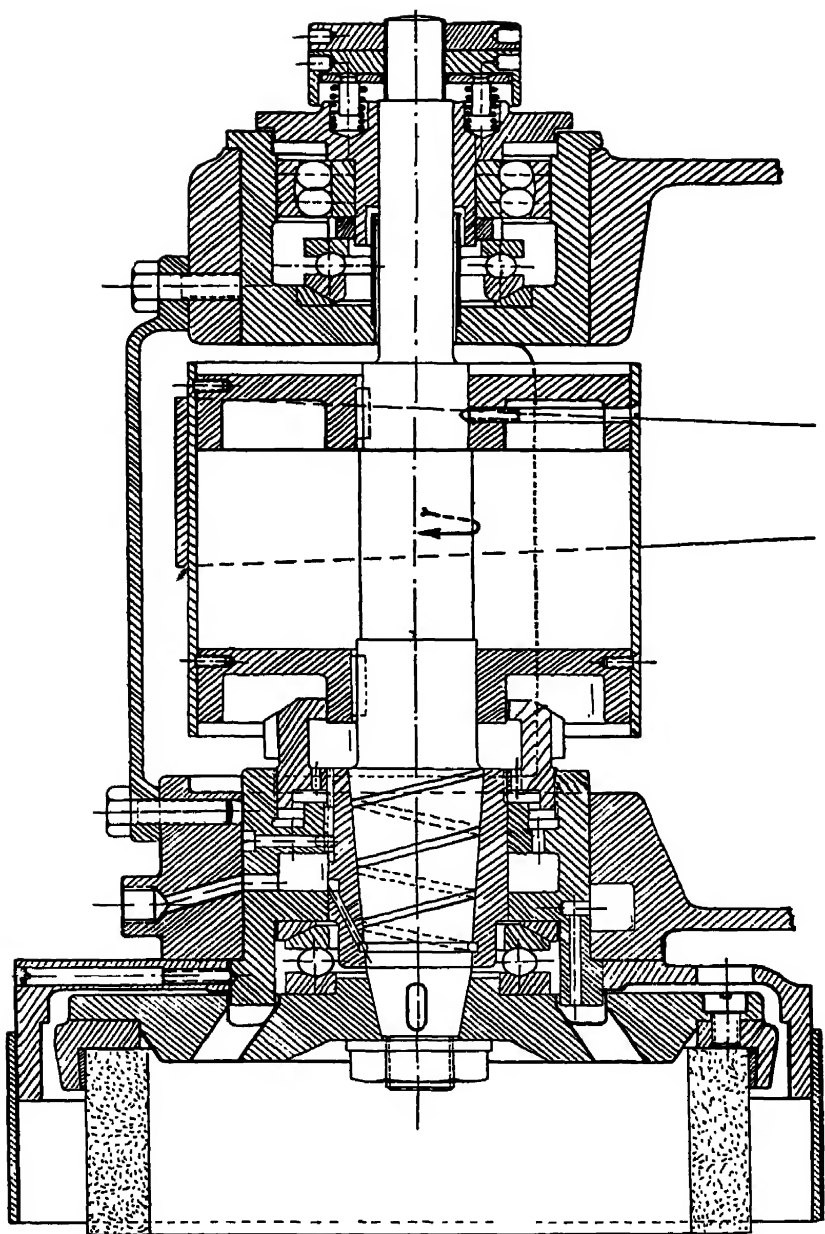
SECTION THROUGH SPINDLE AND BEARINGS
